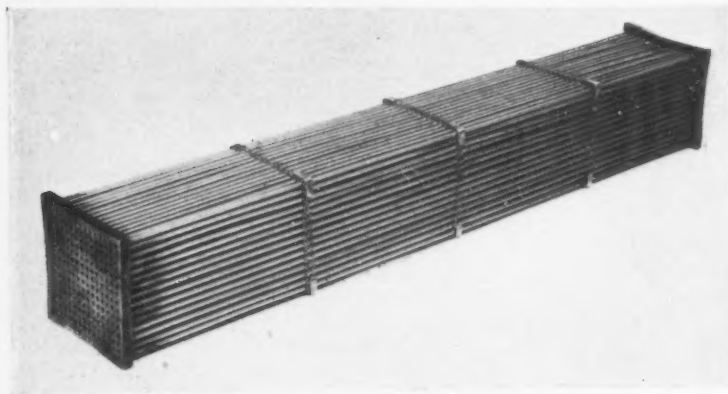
Tubular Heat Exchanger of Stainless-steel. The Tubes are "Cone-arc" Welded to the Header Plates
